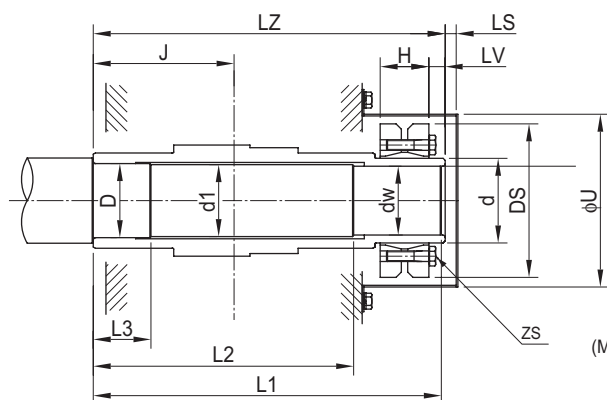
Clamp Collar Method: Hollow Shaft Dimension
